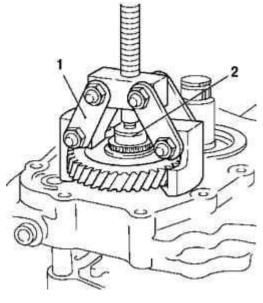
Removing the gear with the help of a special device: 1 - a special device, 2 - thrust bush
